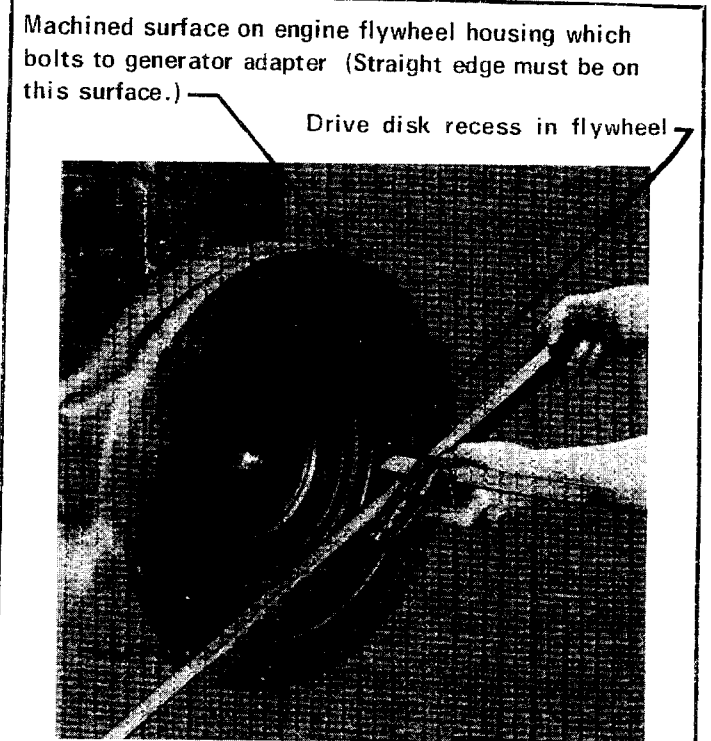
CHECKING SPACING FROM GENERATOR ADAPTER TO OUTSIDE OF DRIVE DISKS (DIM. "Y")
